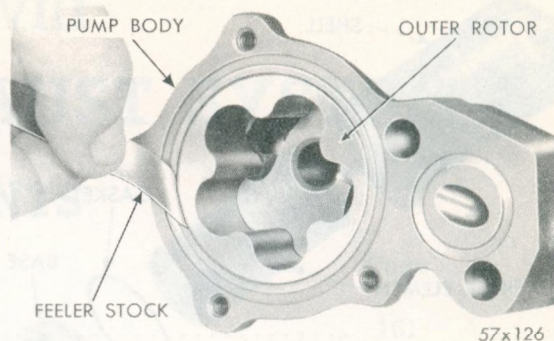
Measuring Clearance between Outer Rotor and Oil Pump Body
